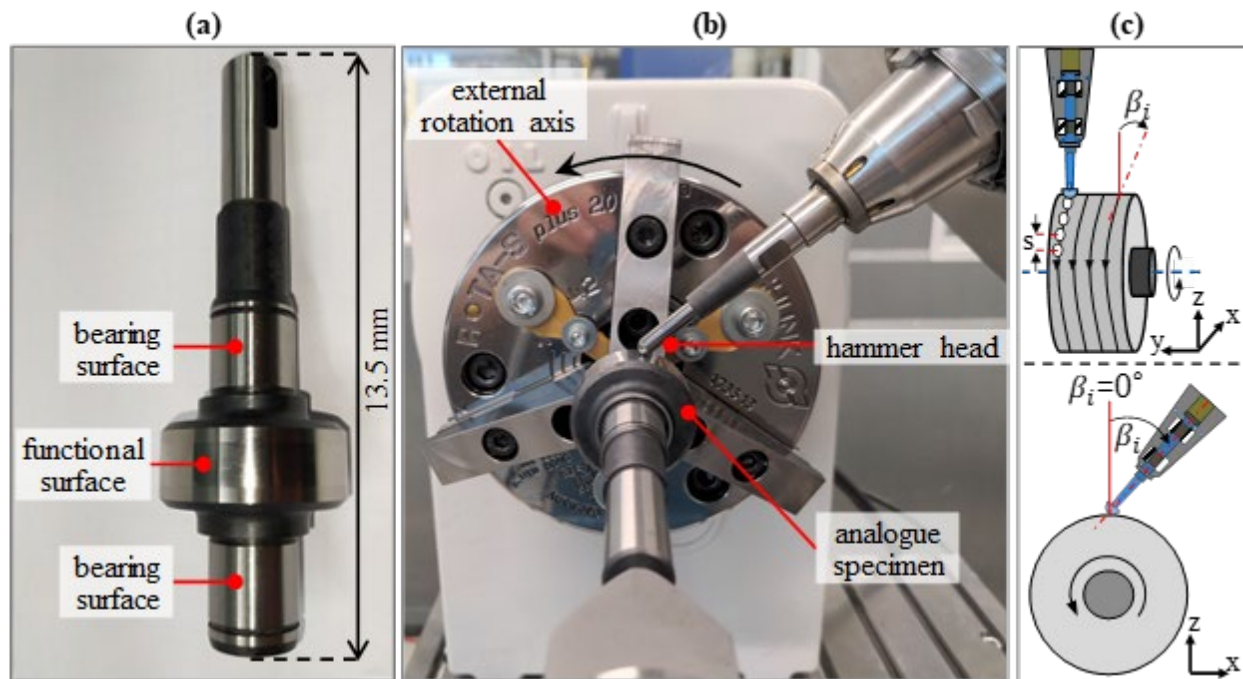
(a) Case-hardened 16MnCr5 gear analogue shaft specimen; (b) Experimental test setup with external rotation axis; (c) Spiral-like machining strategy with MHP impact angle.
